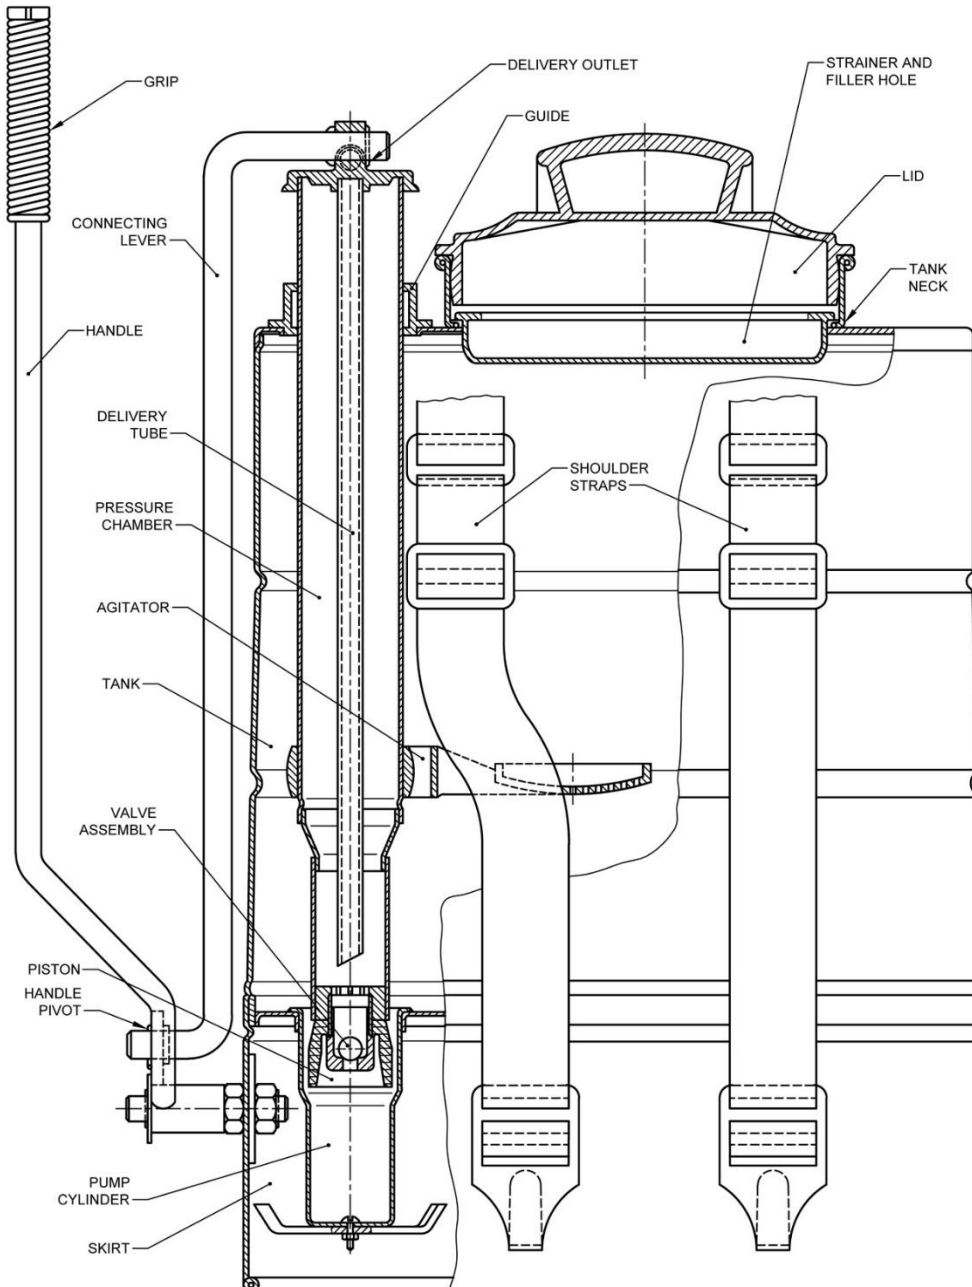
KNAPSACK SPRAYER, PUMP ASSEMBLY INSIDE TANK
